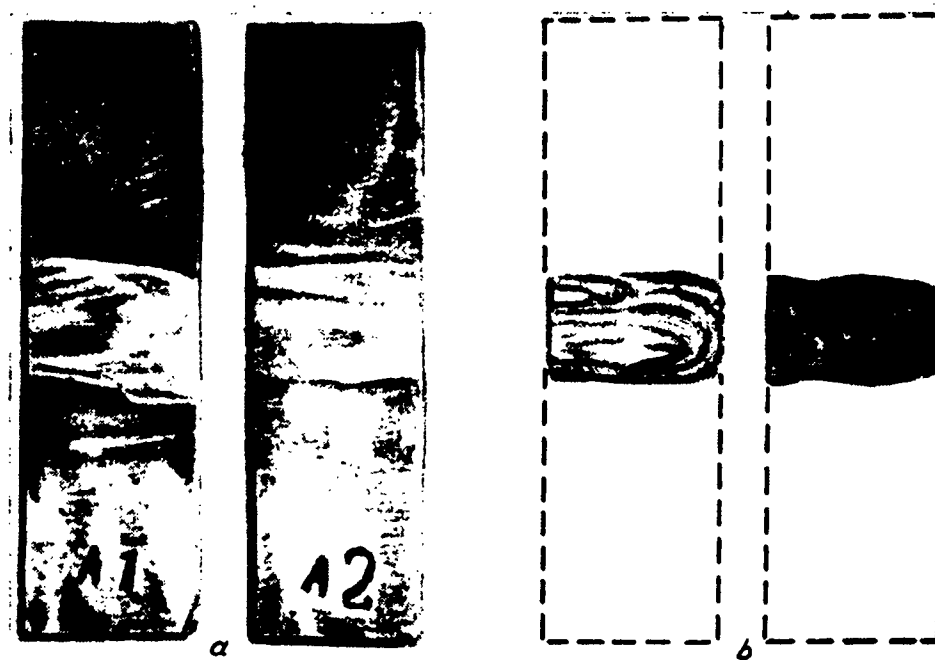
Welded specimens of Kh17 steel with welds containing 18% Cr and 8% Ni, after boiling:
